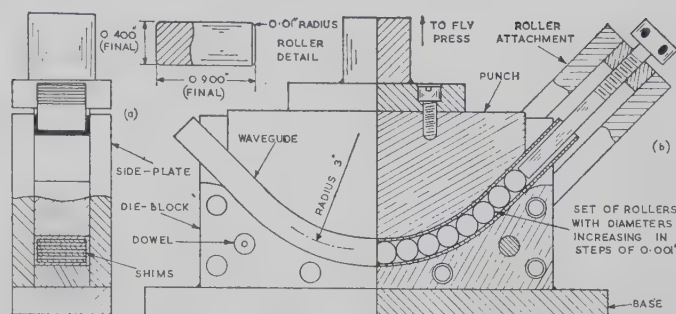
Press tool for bending waveguides; (a) waveguide tube, with shims in position, during bending, (b) insertion of rollers for final sizing.
